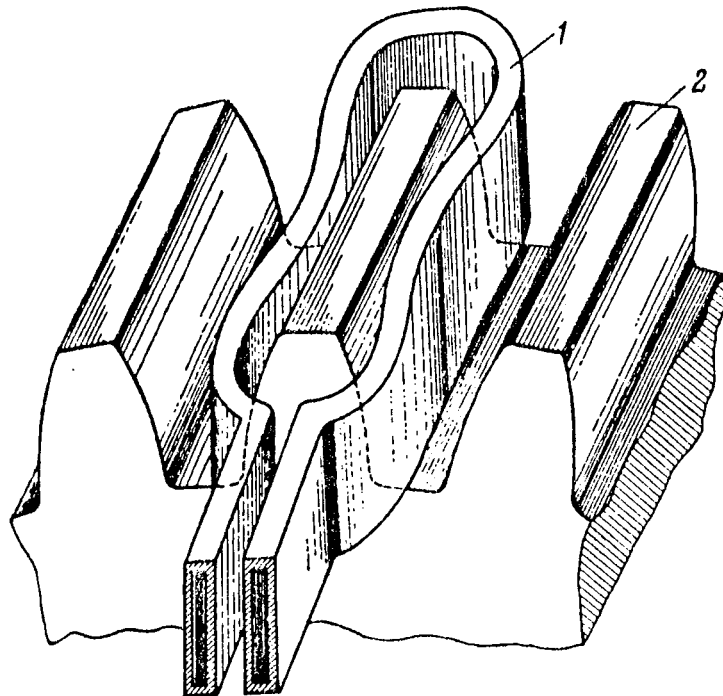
Diagram Showing the Relative Position of the inductor and the Tooth of Gear [12].
